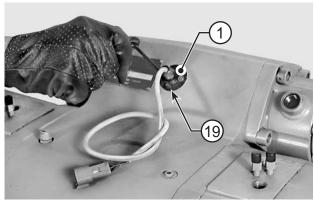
If required, install the steering piston stroke centering sensor (1) for checking piston centering and tighten screws (13). Tightening torque: 5 - 6 N·m
